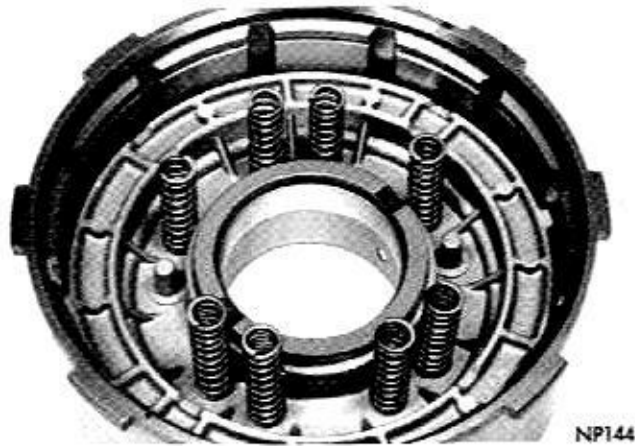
Front Clutch Piston Return Spring Location (8 Springs)
